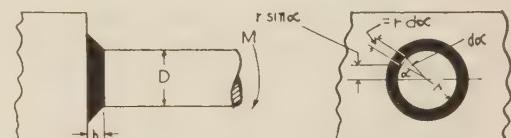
FILLET-WELDED SHAFT SUBJECTED TO BENDING
